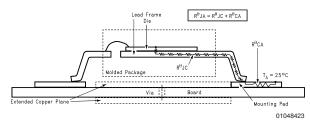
Cross-sectional view of Integrated Circuit Mounted on a printed circuit board. Note that the case temperature is measured at the point where the leads contact with the mounting pad surface
